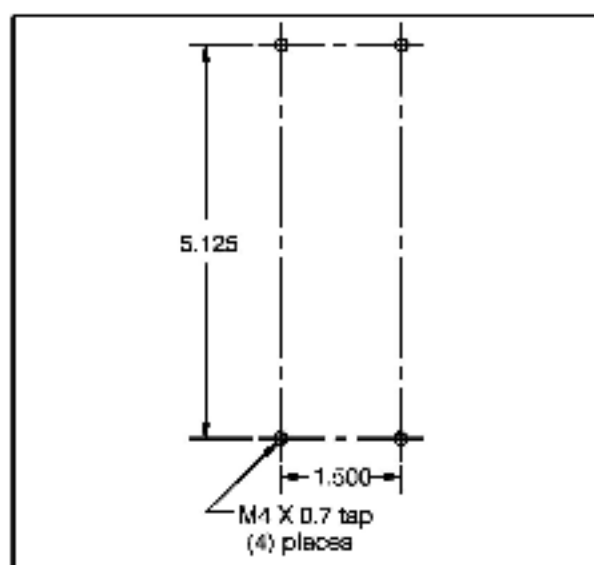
Circuit Breaker Mounting Hole Dimensions.
